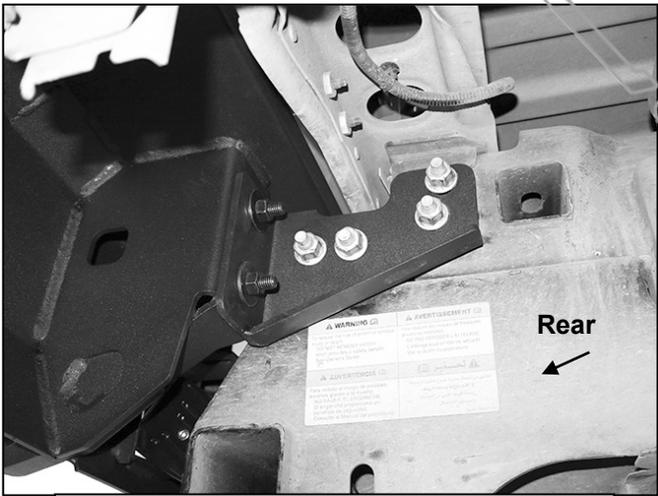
Install wiring harness, trailer plug, license plate lights and spare tire access lock before installing Bumper
